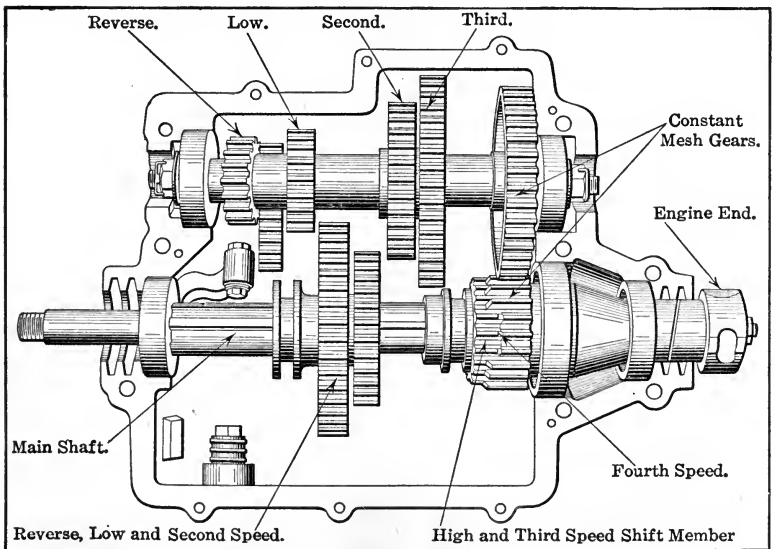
White Four-Speed Gearset Has Direct Drive on Highest Ratio.
